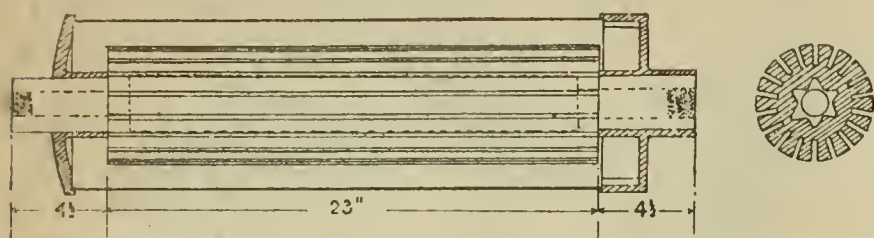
SECTION OF "BELENUS" ELECTRIC BOILER.
